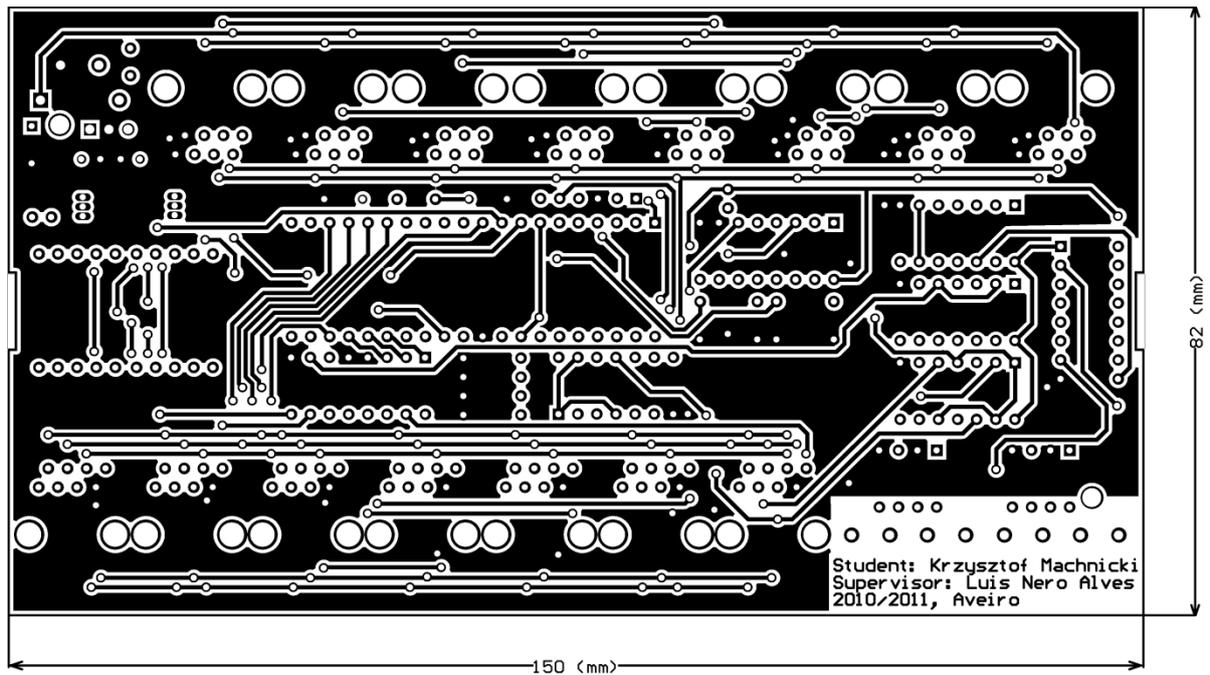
CONTROL BOARD'S TOP LAYER.
